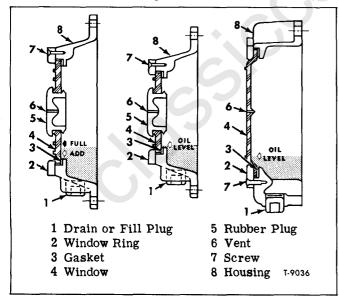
Oil Levels (Oil Lubricated Type Bearings)
